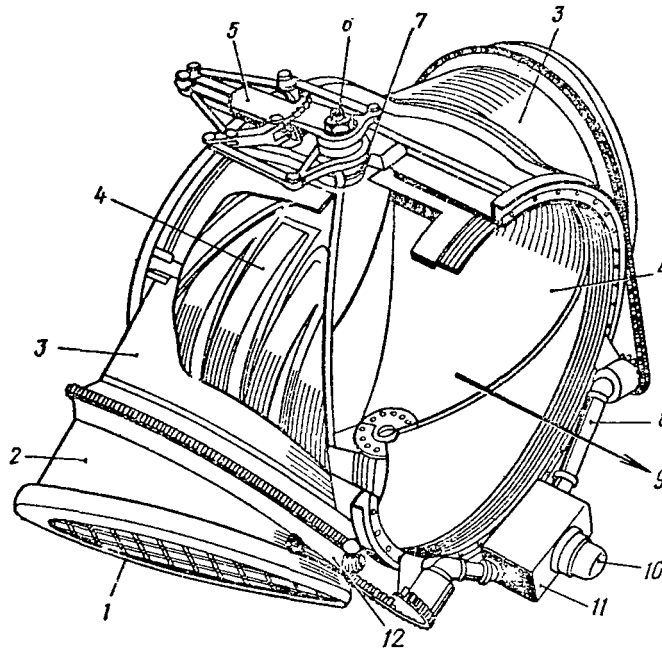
Assembly of Deflector Used in the Rolls-Royce Medueus Bypass Engine. Position of Shutters in Horizontal Flight: 1, Screen; 2, Tilting Nozzle; 3, Bend; 4, Shutters; 5, Hydrocylinder for Shutter Control; 6, Lift Lug; 7, Roller Bearings of Shutters; 8, Drive Shaft of Nozzle Tilting Mechanism; 9, Direction of Gas Flow to Jet Nozzle; 10, Hydraulic Motor of Nozzle Tilting Mechanism; 11, Reducer; 12, Tilting Nozzle Ball Bearing.
